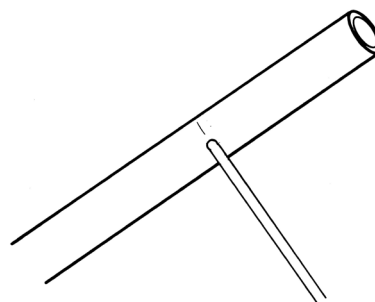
Yakidama method for cut of a glass tube after scratching.
